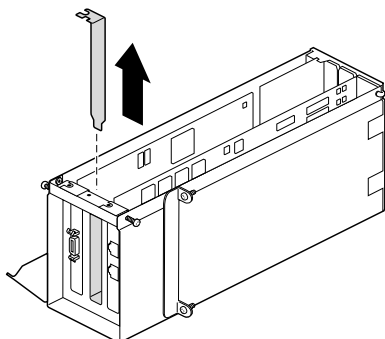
CT/i (Octane) Host -Removing screws securing the PCI board
